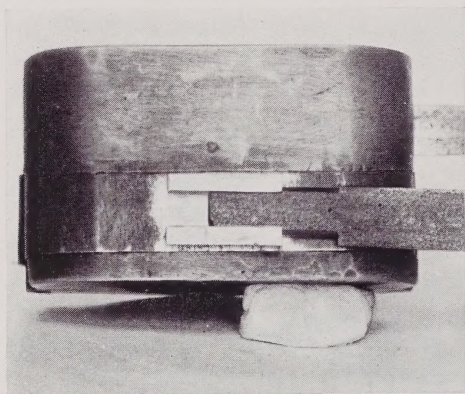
Trench type flask with handles inserted in extension pieces.
